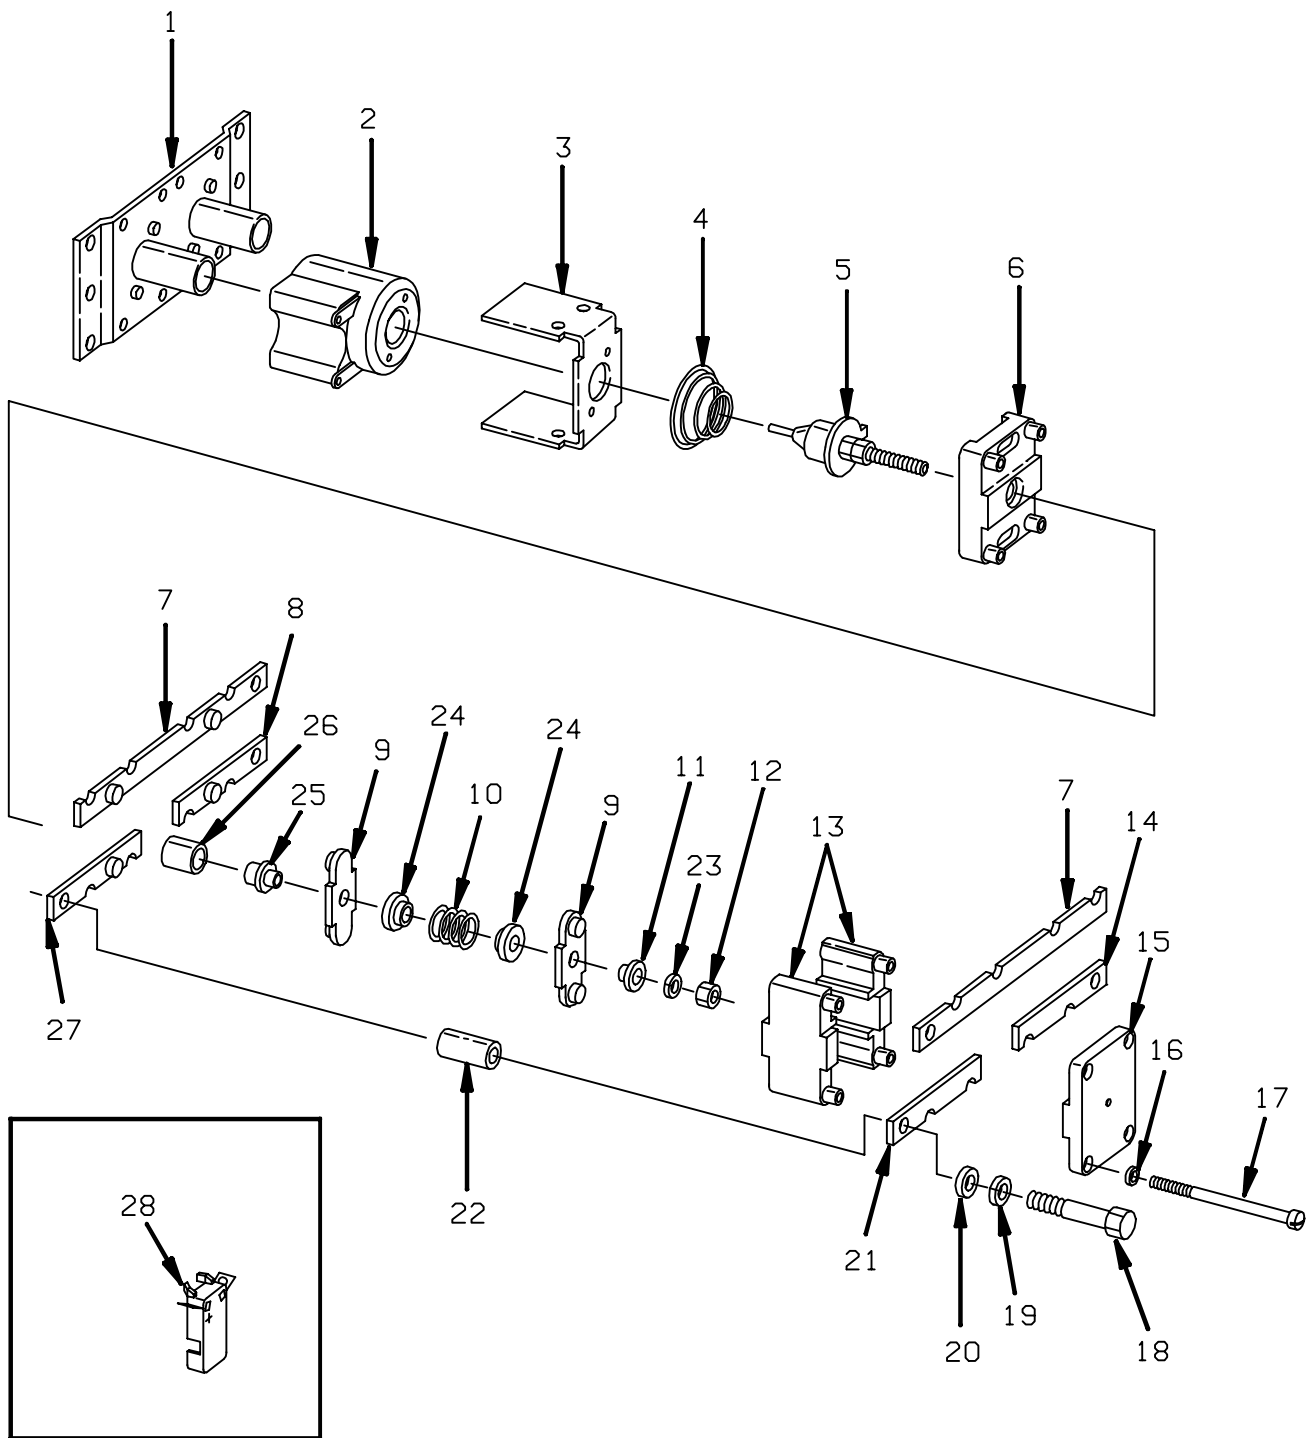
LIFT PUMP MOTOR ASSEMBLY, 24 VOLT (27900-00, 5BT1324B54) G.E.
